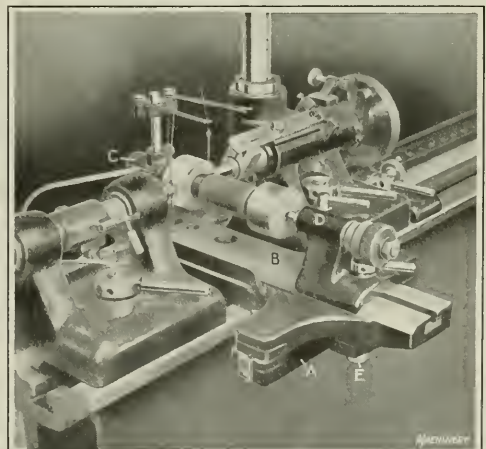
Attachment developed to facilitate the measuring of Thread Plug Gages held between Centers
